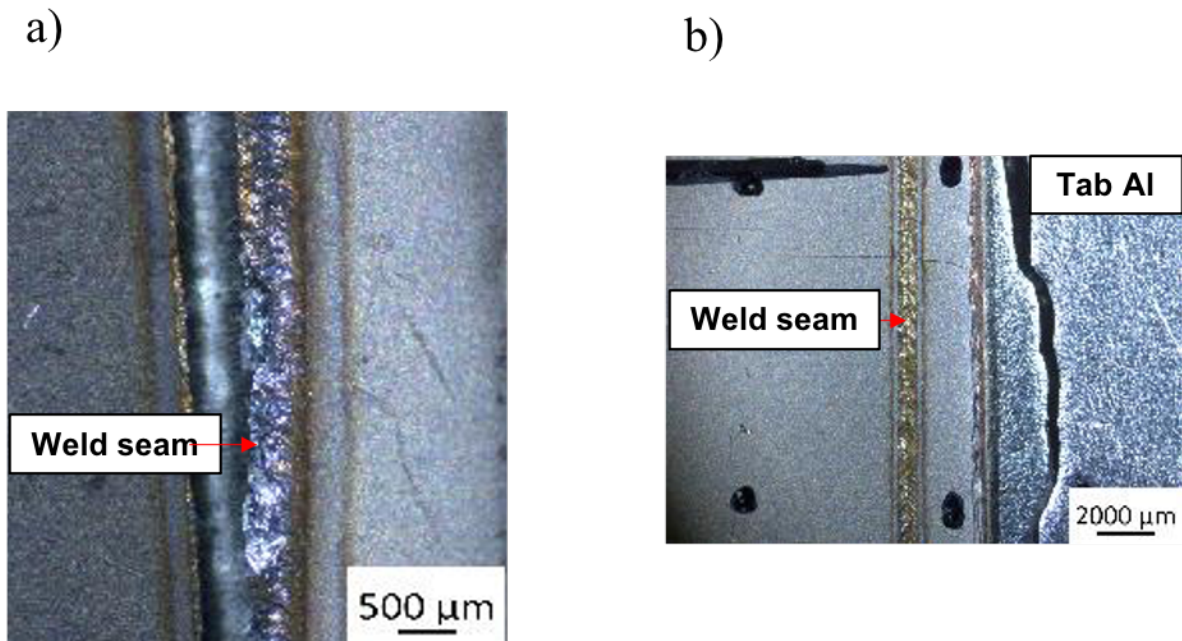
Example of failure mode for Cu-Al-Busbar: failure at the weld seam(a), failure at the base material (b)
